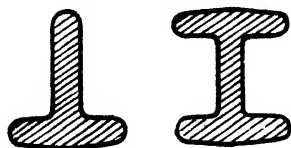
T- and H-shaped ribbed designs have the advantage of uniform metal sections and hence uniform cooling.
